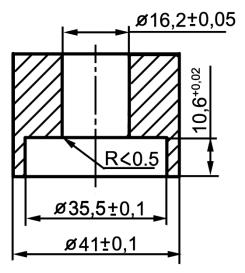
Mandrel for the water pump sealing pressing in (main design dimensions).
